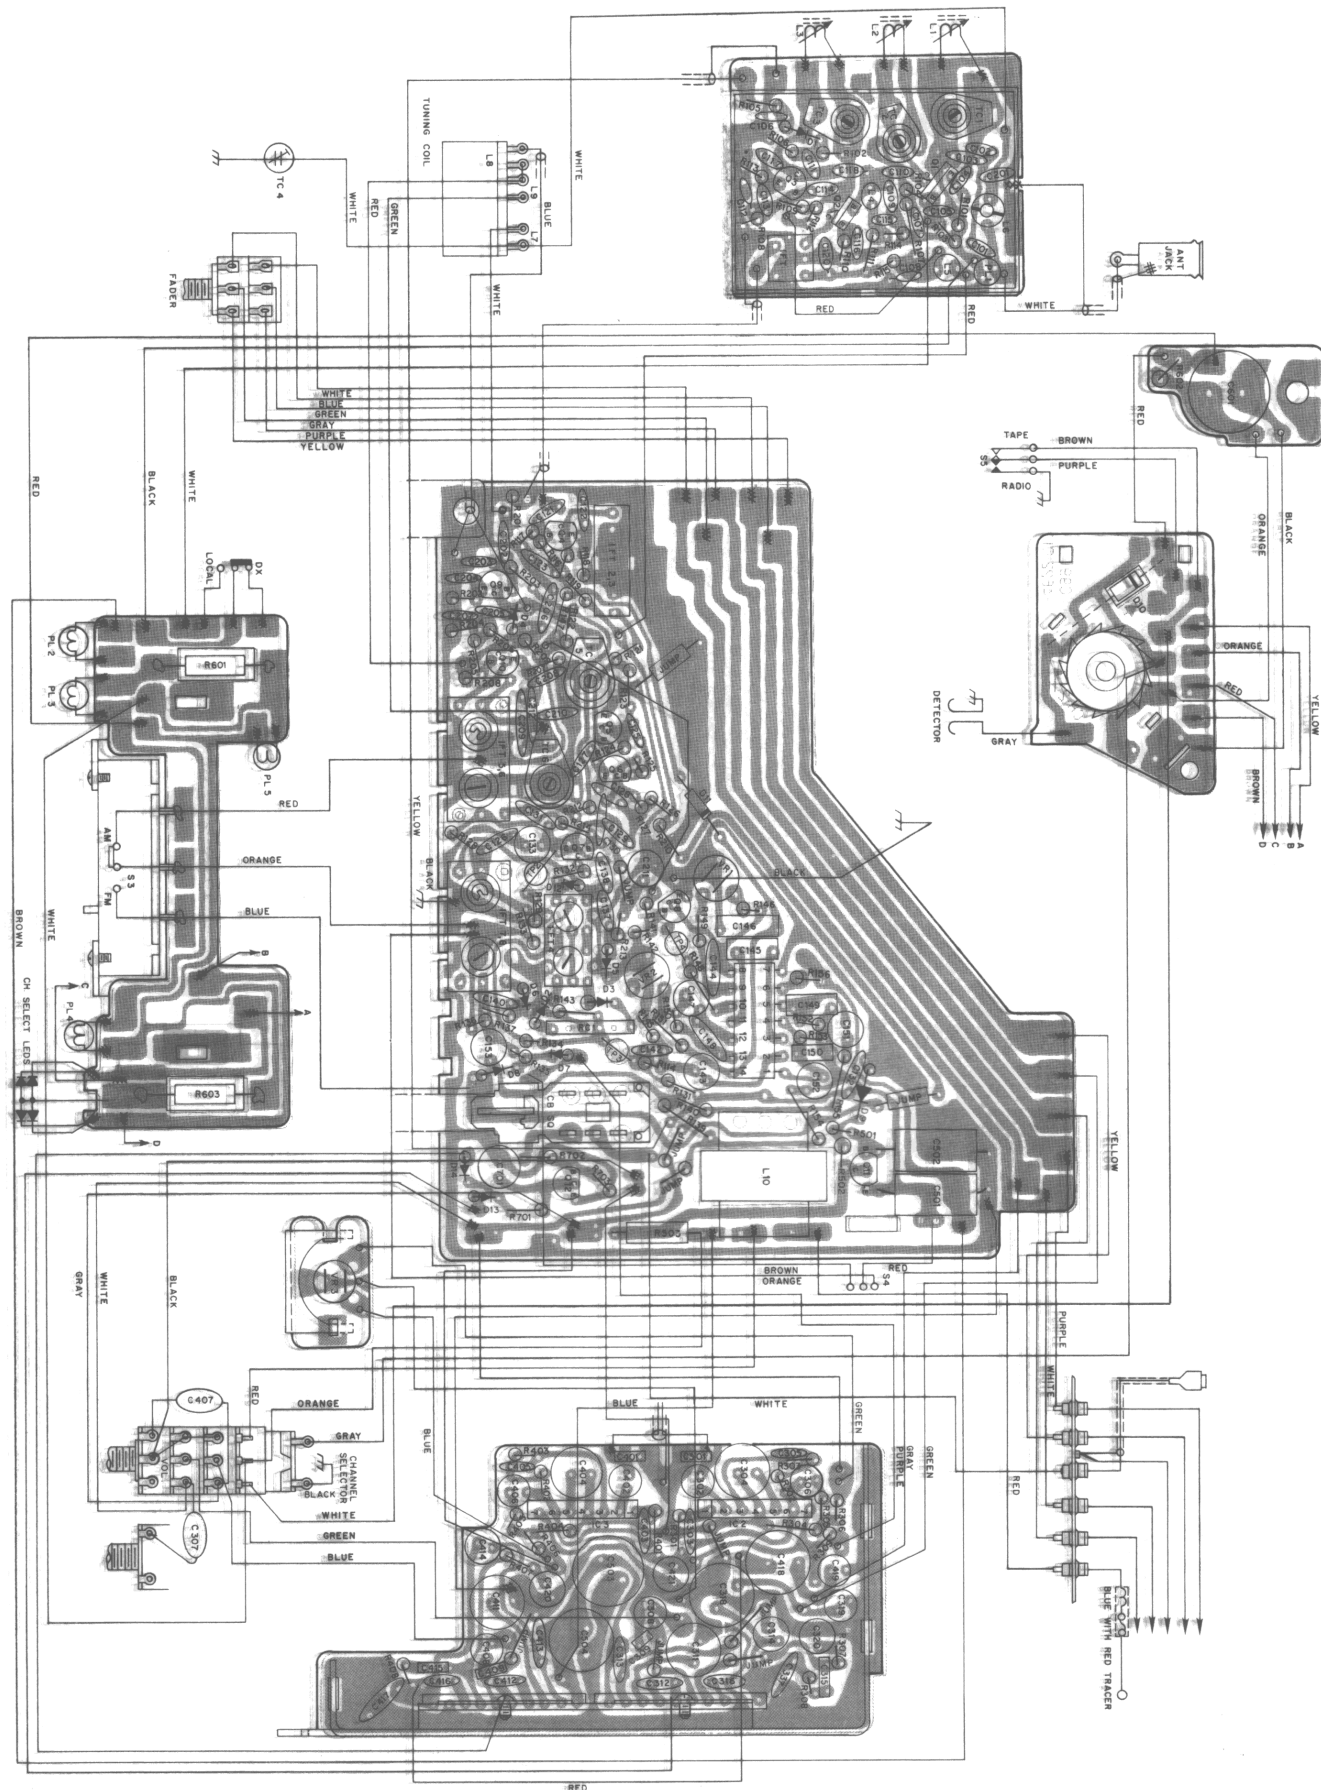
Component Outline, P.C. Boards, Model 4701
